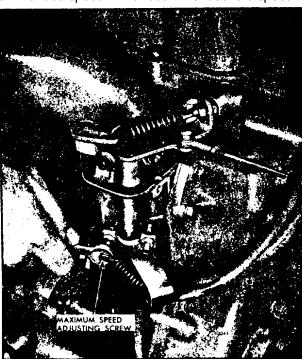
Adjusting Maximum No-Load Engine Speed
